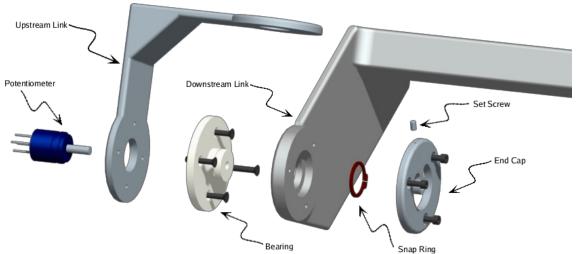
Exploded view of typical potentiometer stress relief bearing design
